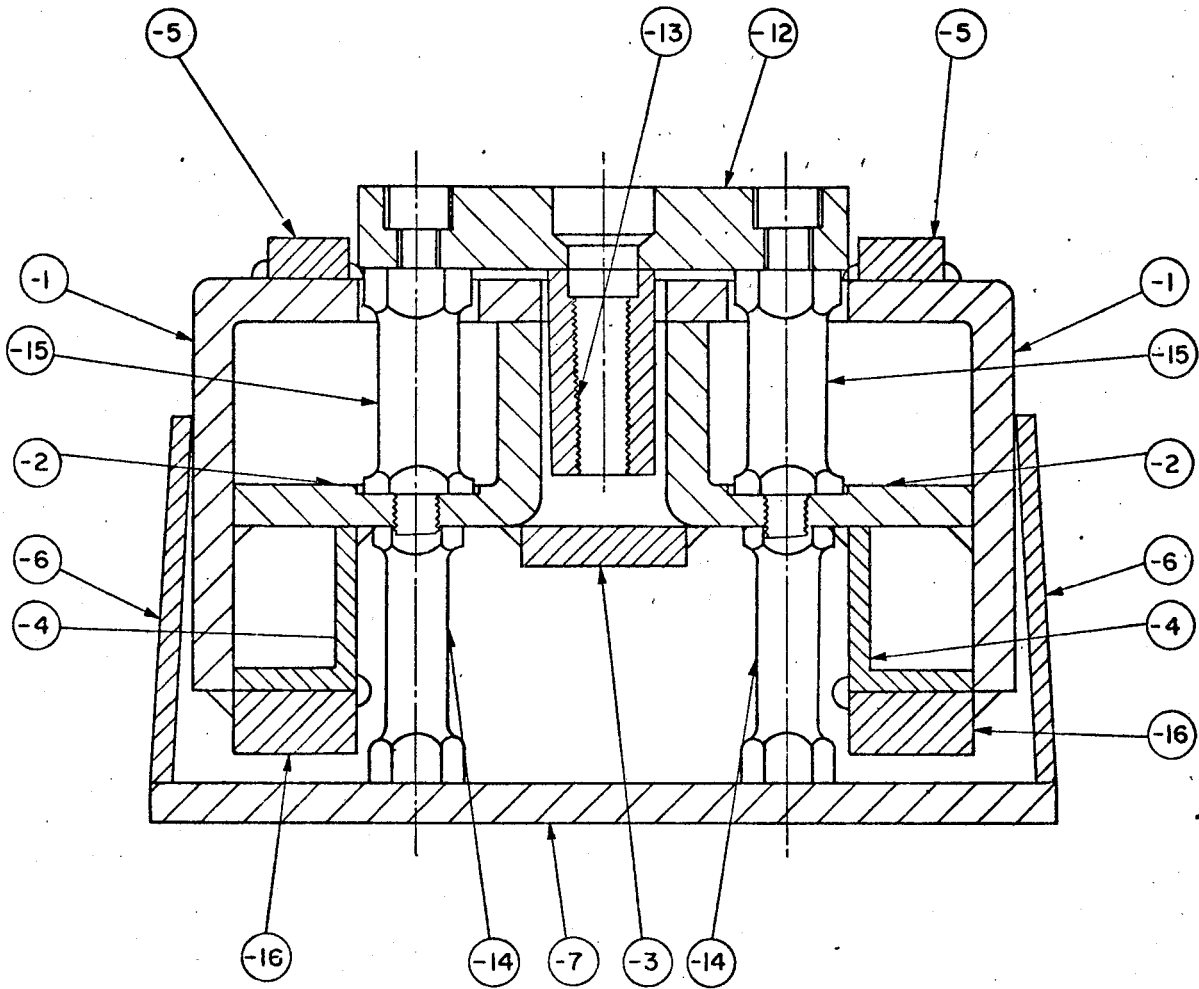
CONCRETE TIE ASSEMBLY - CROSS SECTION
